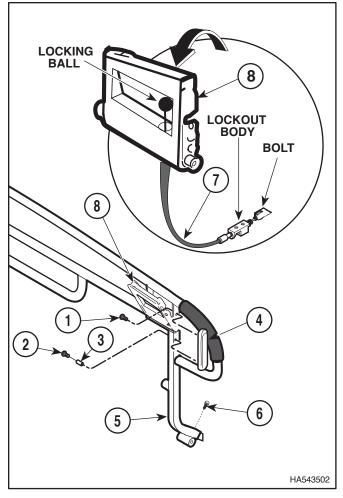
750N and 750W Siderail Latch Assembly Removal / Installation
